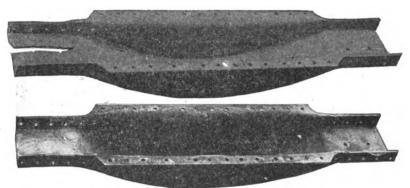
Split Steel Bolster Welded by Gas Torch
